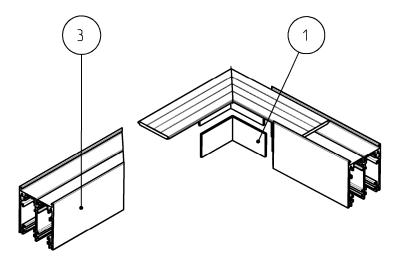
Exploded drawing of coupling for top and bottom guide profile
